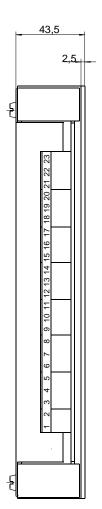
Dimensional Drawing PKG .. - 04 - 55
